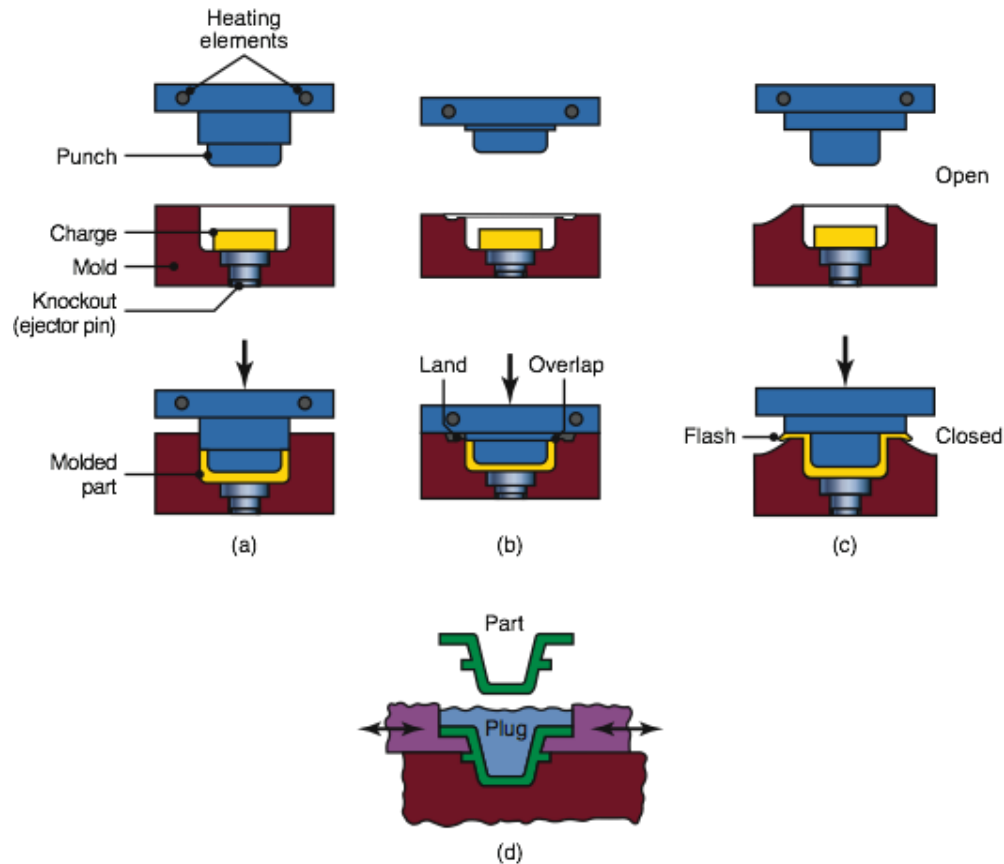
Types of compression molding, a process similar to forging: (a) positive, (b) semipositive, and (c) flash. The flash in part (c) is trimmed off. (d) Die design for making a compression-molded part with undercuts. Such designs also are used in other molding and shaping operations.
